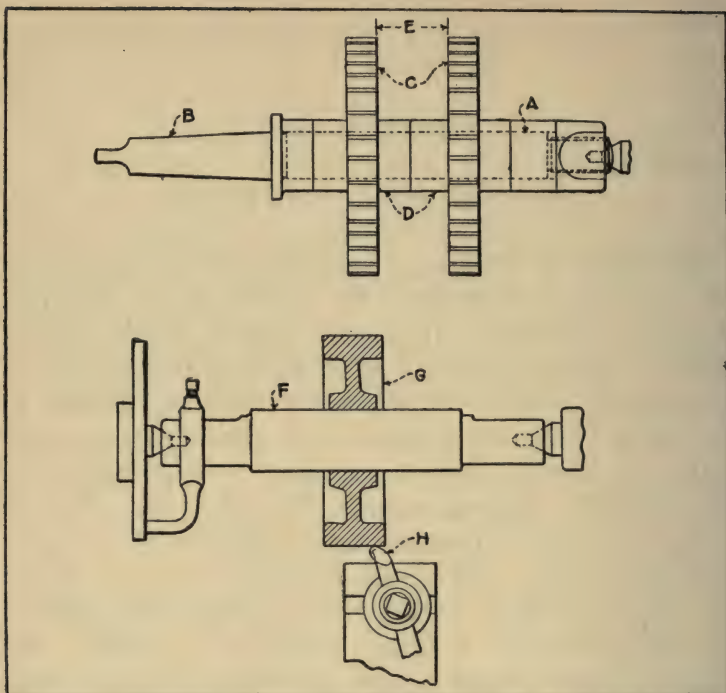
ARBOR FOR MILLING MACHINE, ABOVE, AND FOR PLAIN LATHE, BELOW
